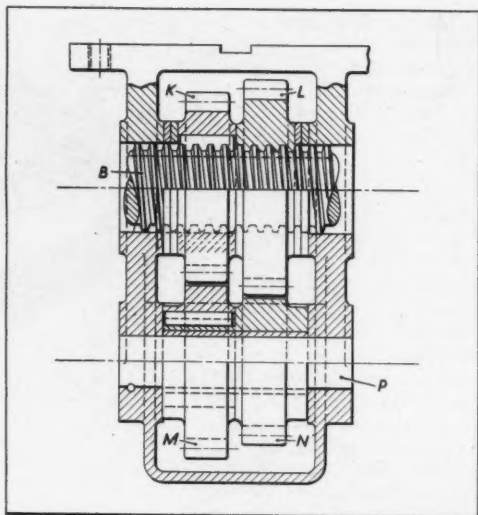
Compound gearing provides for traversing each support member at the required speed relative to that of the boring head
